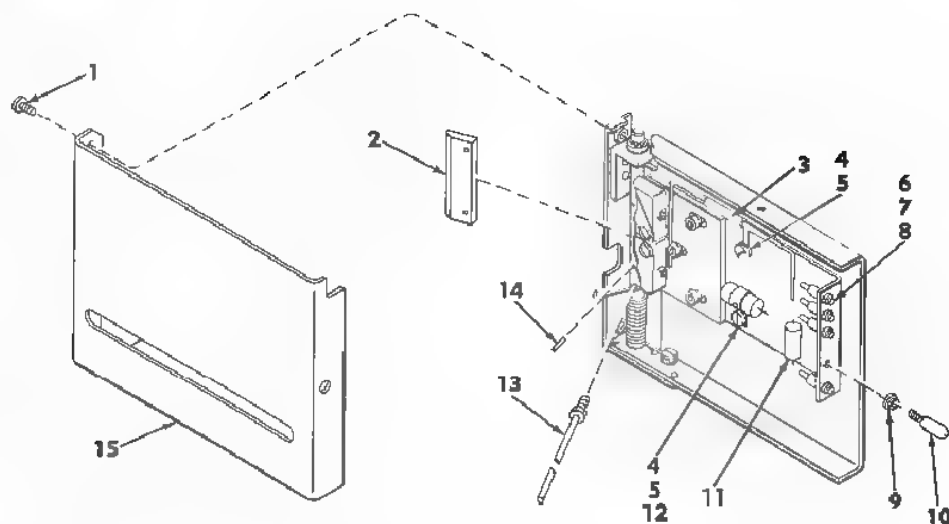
MODULATOR /8172445/-PARTIAL EXPLODED VIEW
